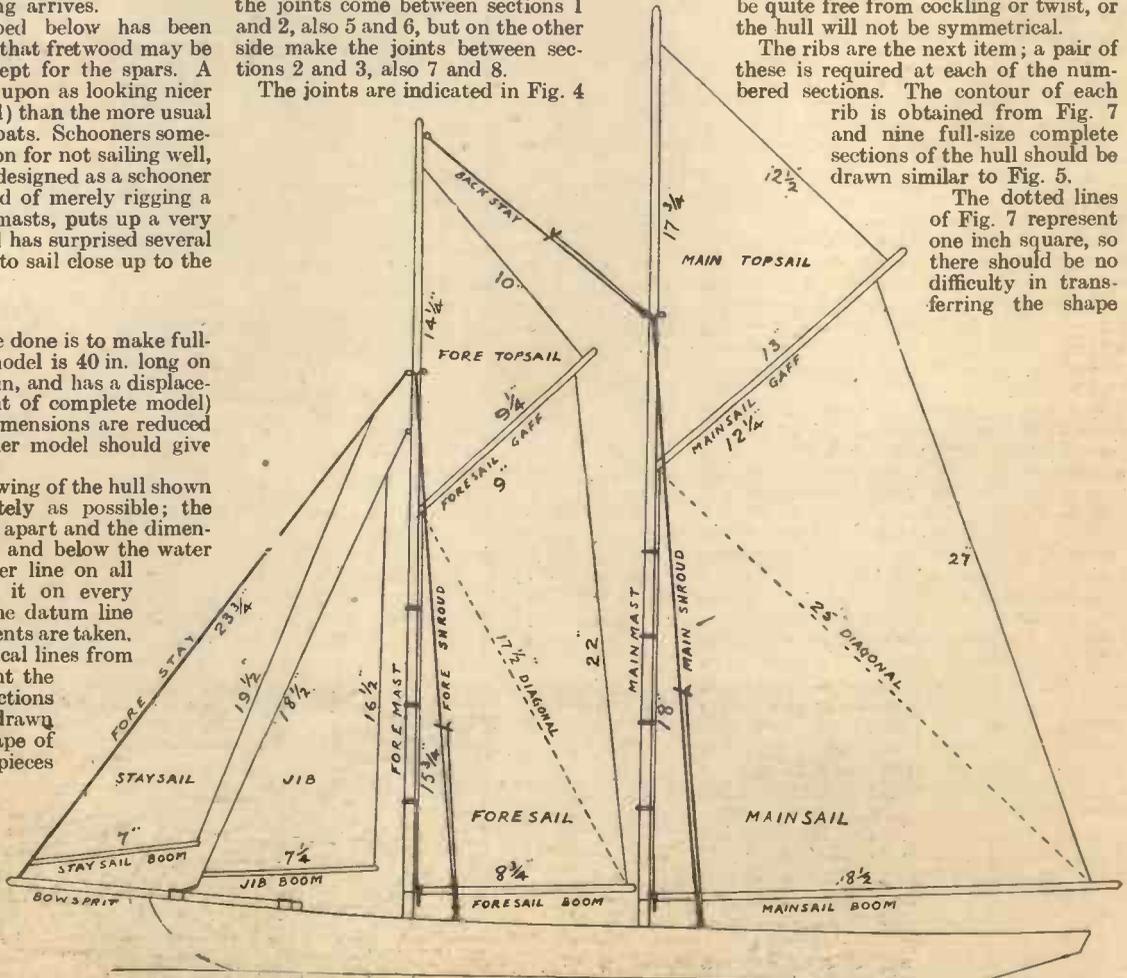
The general arrangement of the yacht, showing the sail plan.
